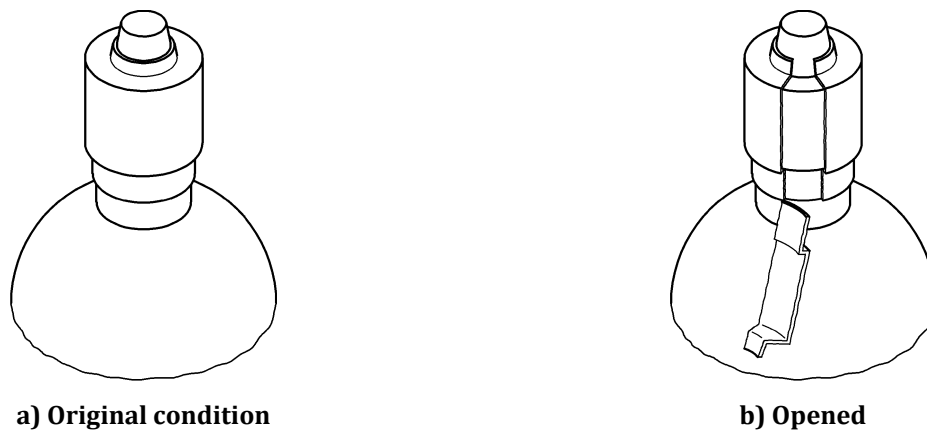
Example of a sleeve shrunk around a closure of a bottle
